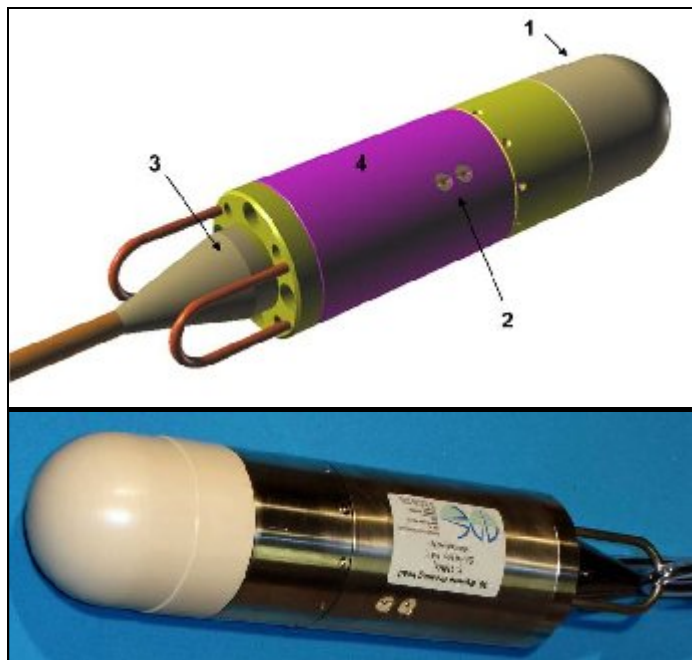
SLIM sonar head 3D model with parts labeled, and completed assembly.
